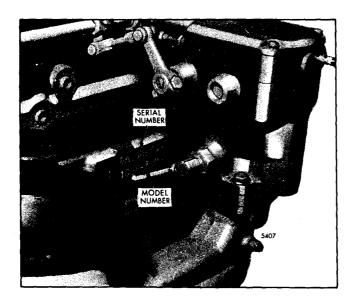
Typical Engine Serial Number and Model Number As Stamped on Cylinder Block (Current Engines)
